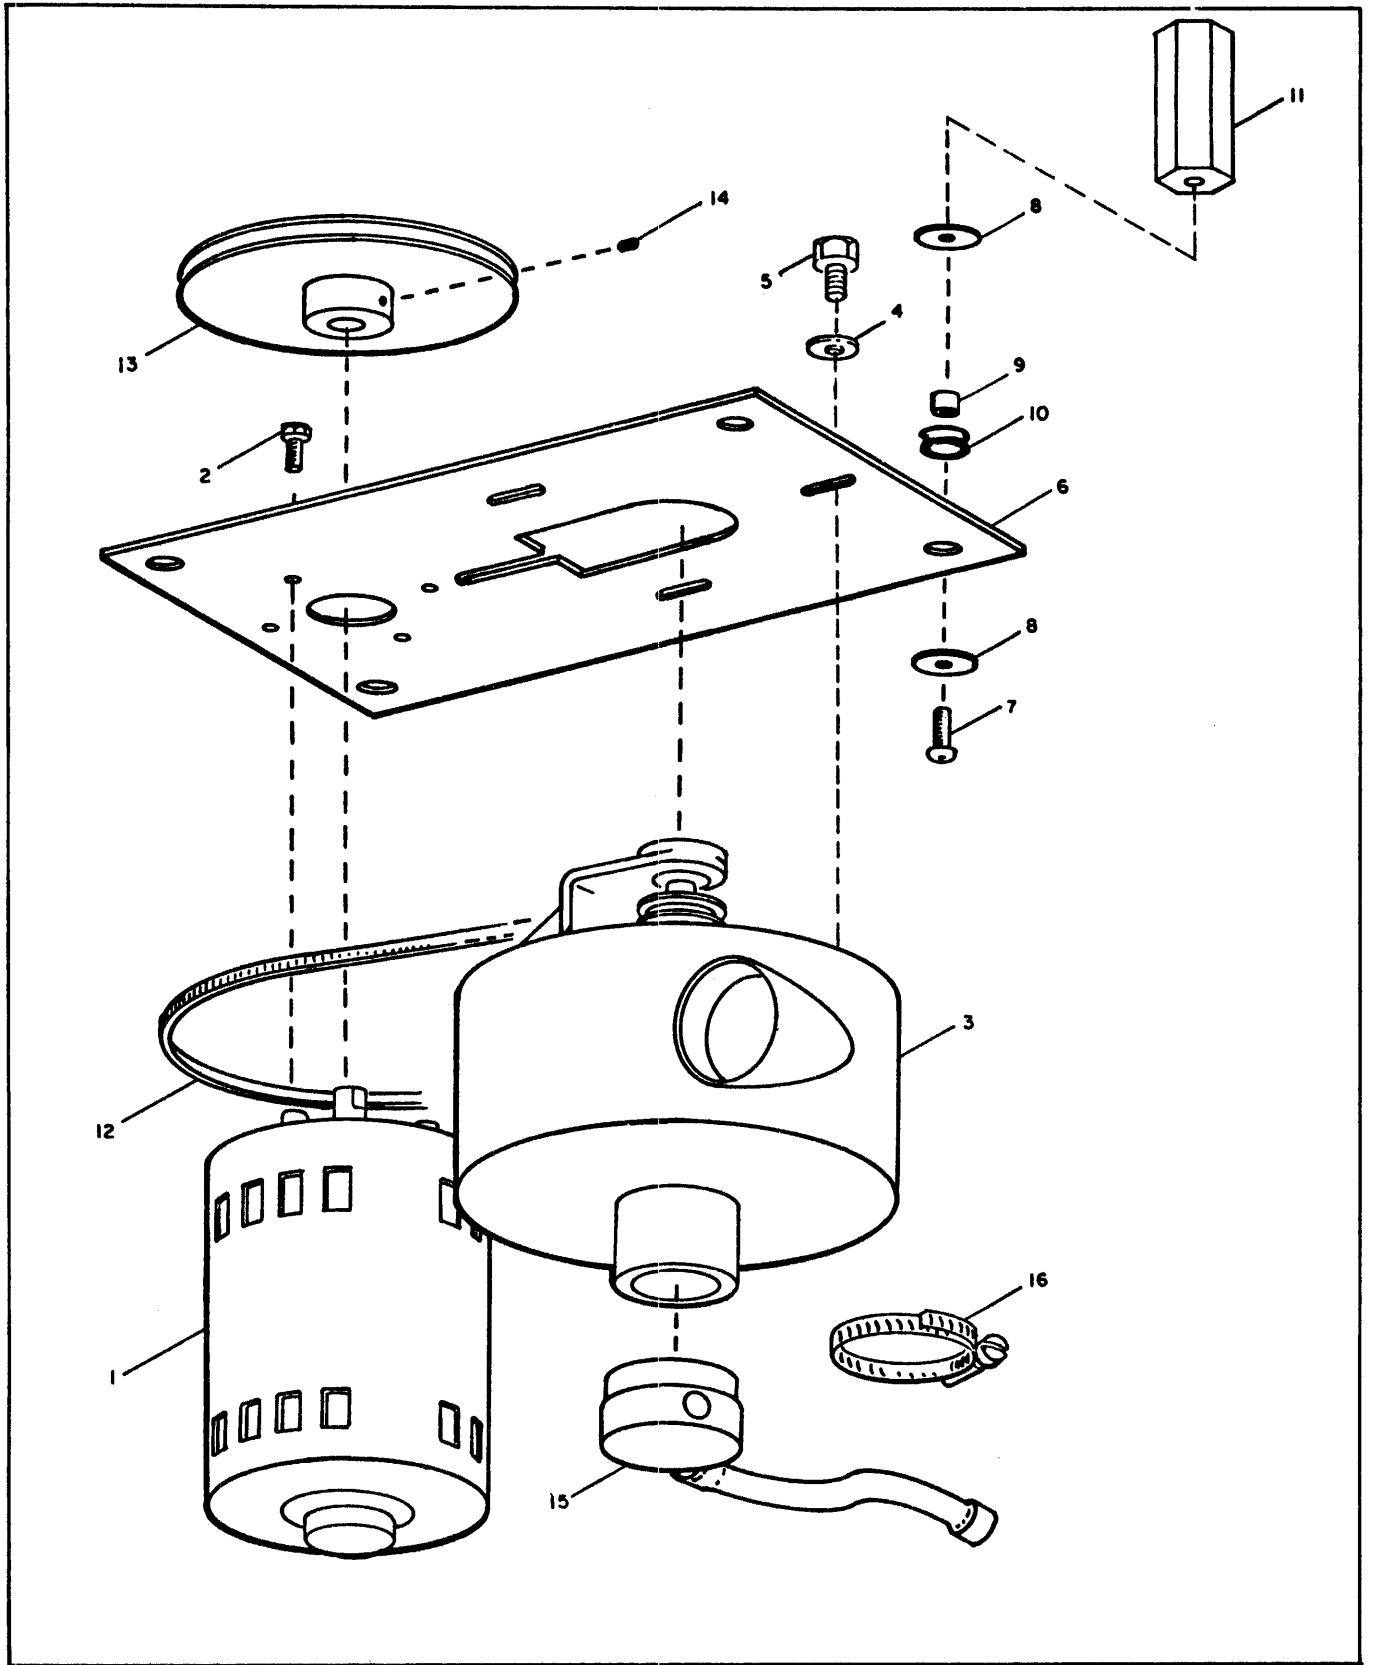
VACUUM PUMP ASSEMBLY
